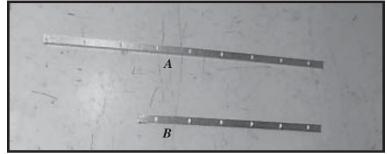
A. Bottom front angle bracket. B. Top angle bracket.
